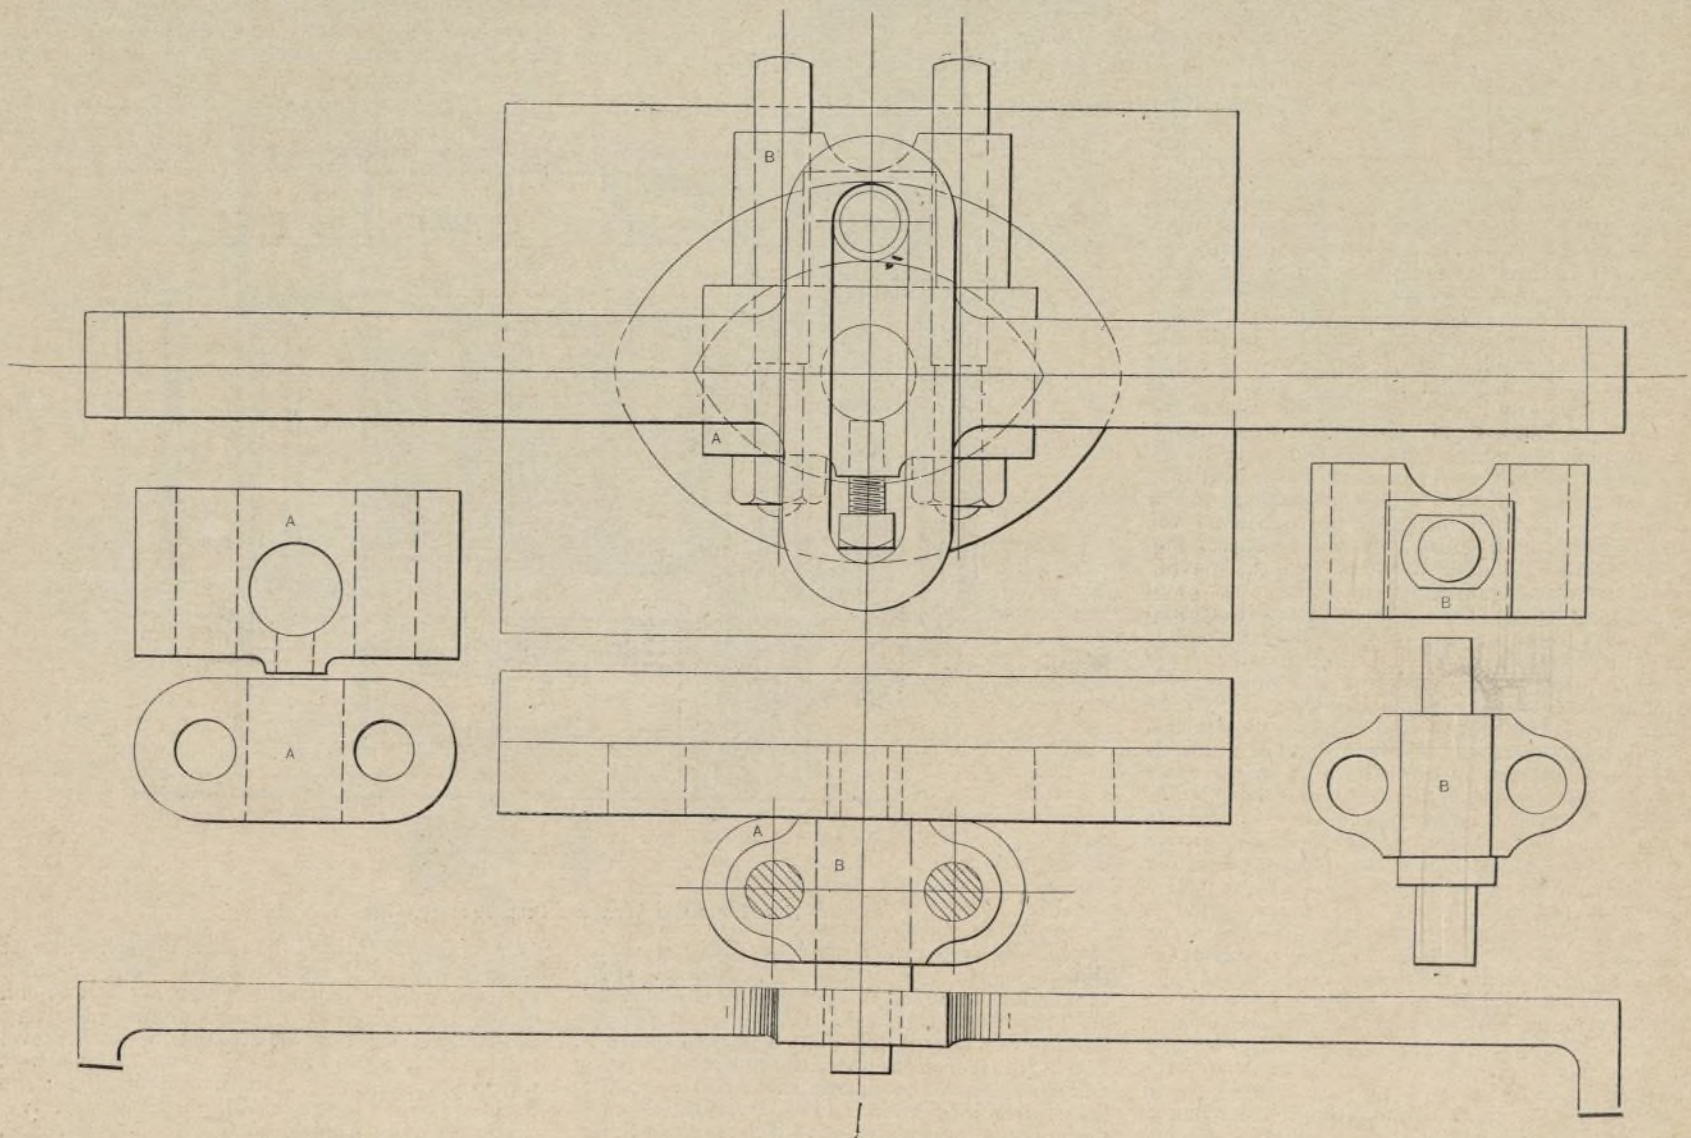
WINDING MACHINERY.—FIG. 2.
